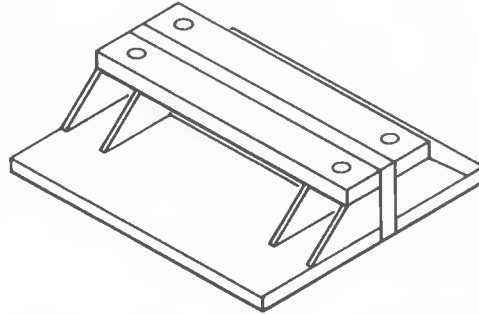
Aluminum adapter for loading the 20' wood blade test specimen.
